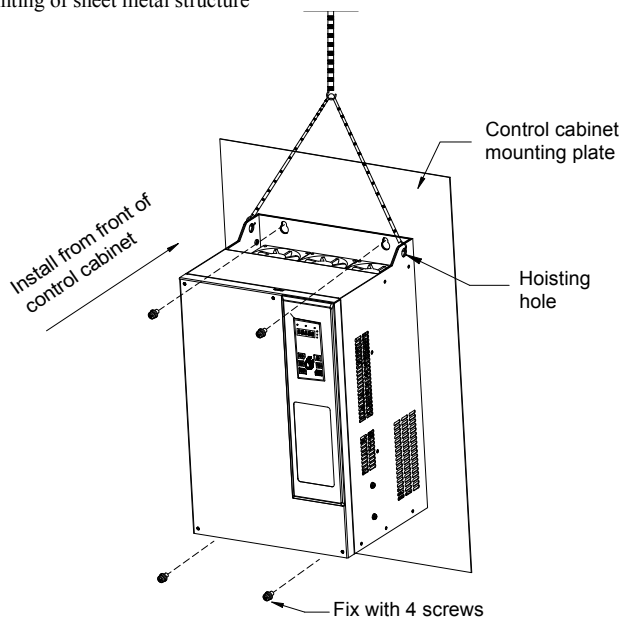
Wall-mounted Installation Diagram of Sheet Metal Structure
